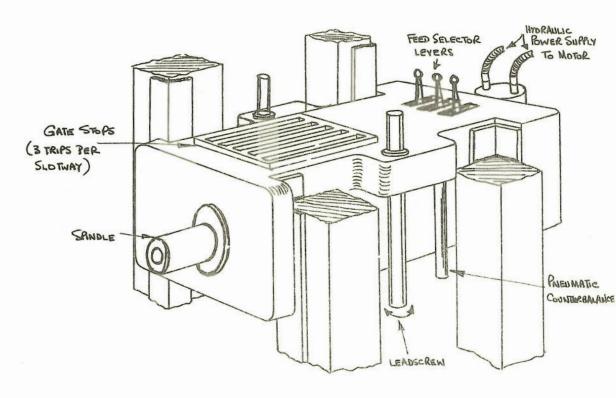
SKETCH OF DRILL HEAD ASSEMBLY.
